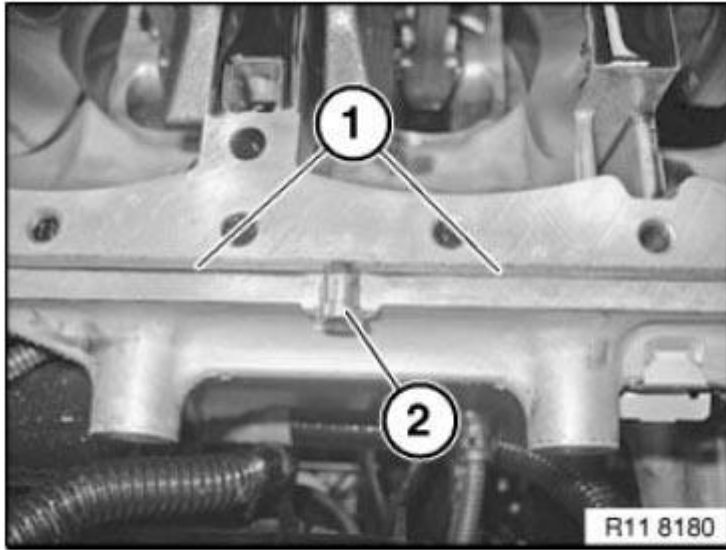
Identifying Injector Nozzle And Sealing Compound Residue
